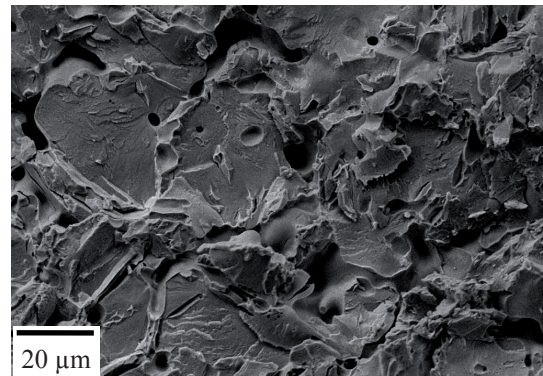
Fracture surface of composition (A) sintered with slow cooling rate
